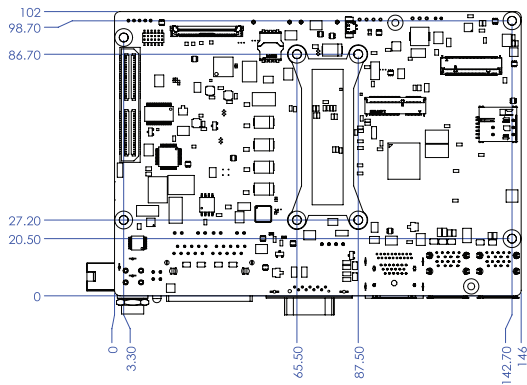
MIO-5373 Mechanical Drawing (Bottom Side)
